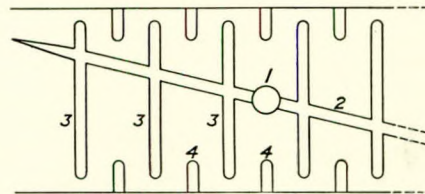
Suggested oil grooving for oscillating bearings (Barwell)
